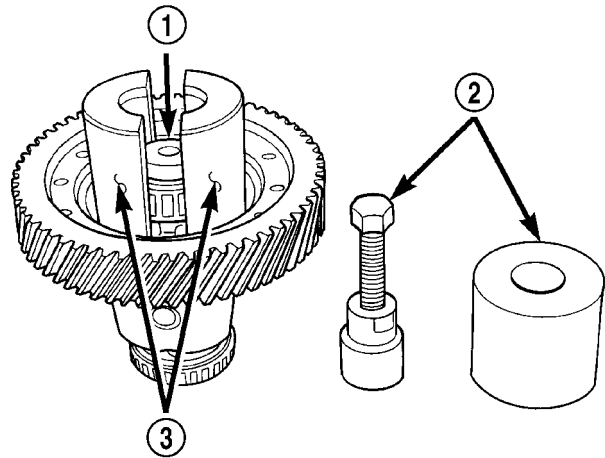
Position Button and Collets Onto Differential and Bearing (Ring Gear Side)
